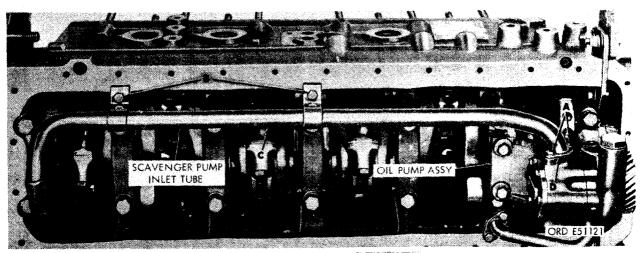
REMOVING OR INSTALLING SCAVENGER PUMP INLET TUBE.
